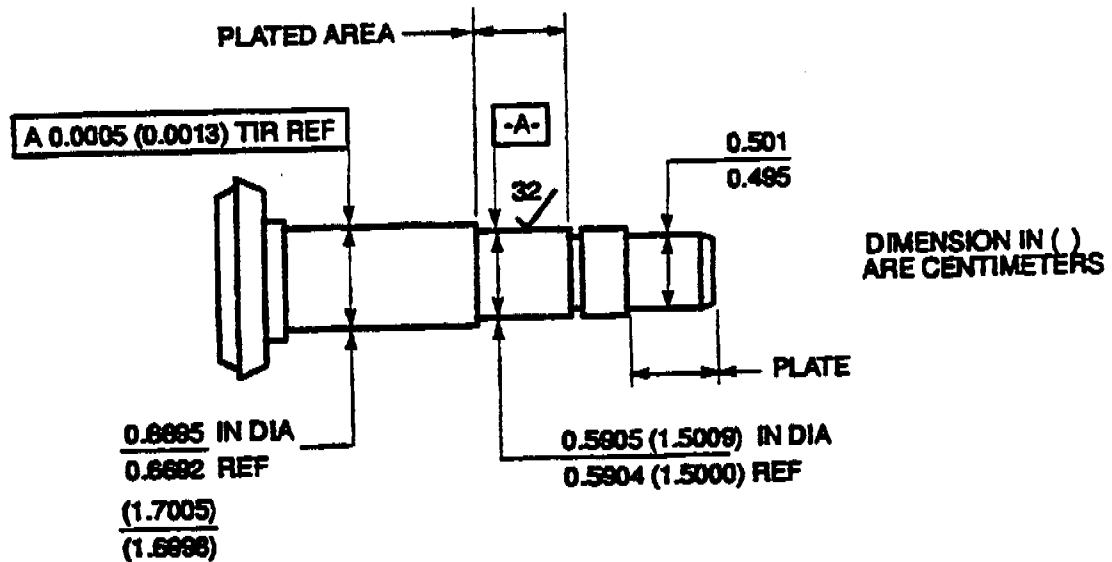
Tachometer Drive Gearshaft Assembly Repair Area.
